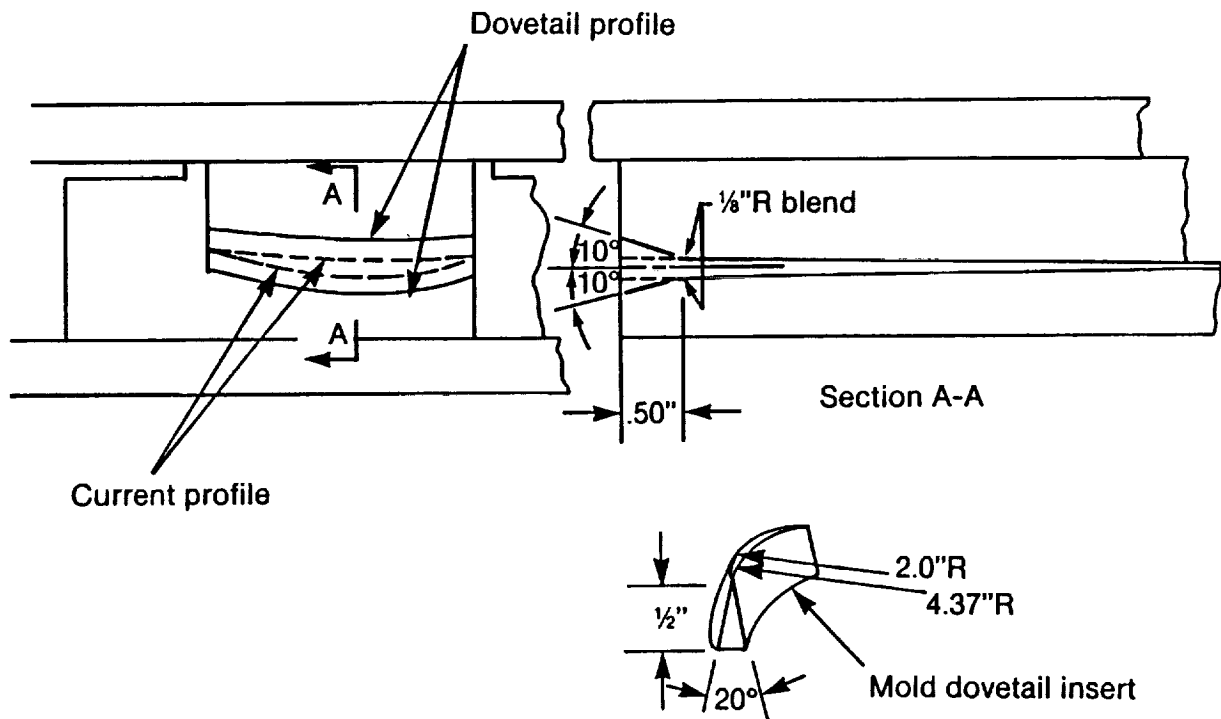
Vane Mold Tool with Dovetail and Dovetail Insert.
